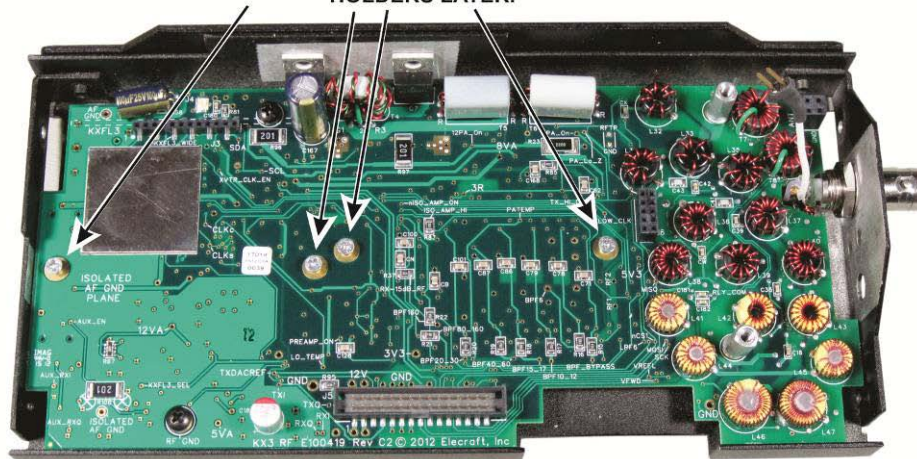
Checking the Alignment of the Battery Holder Standoffs.
